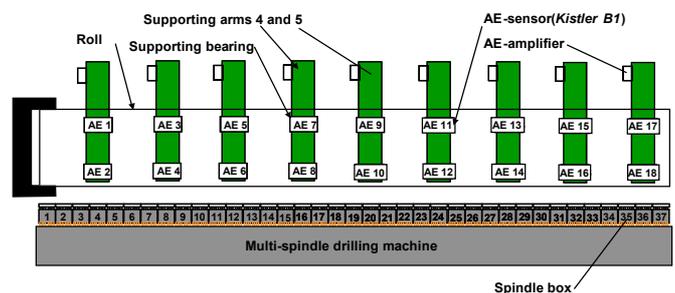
A schematic illustration of a multi-spindle drilling machine.
